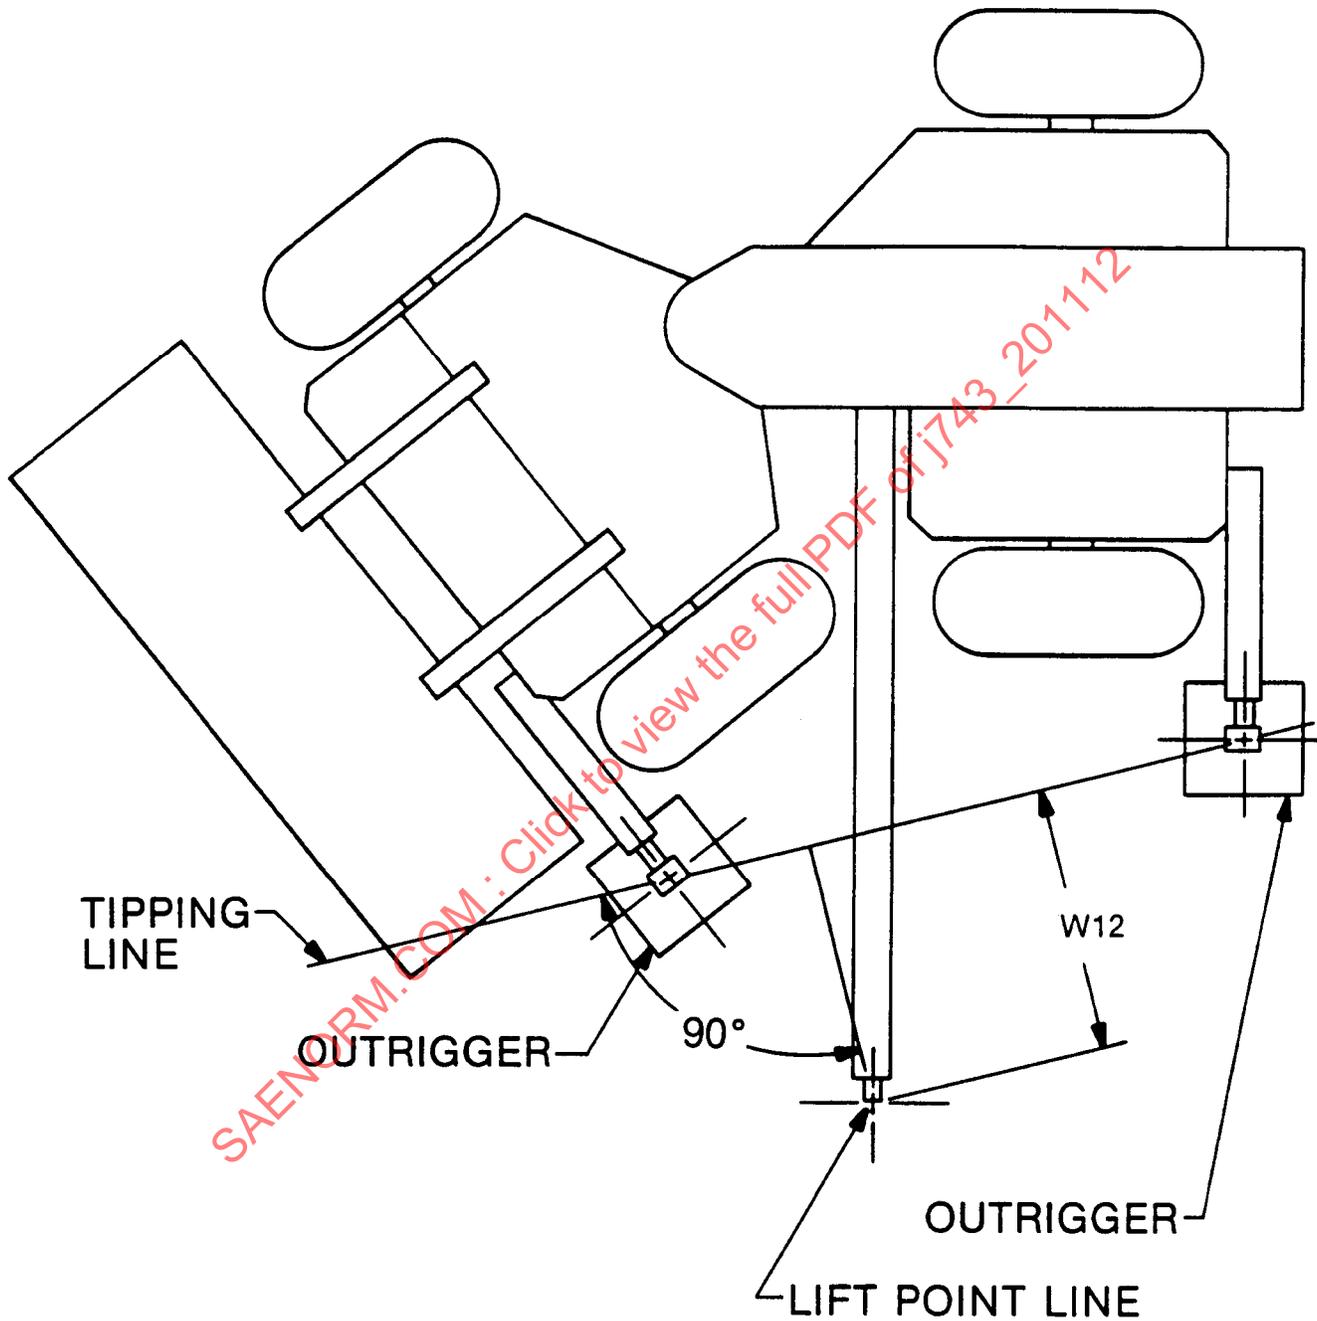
ARTICULATED MACHINE USING OUTRIGGERS STEERED LEFT
